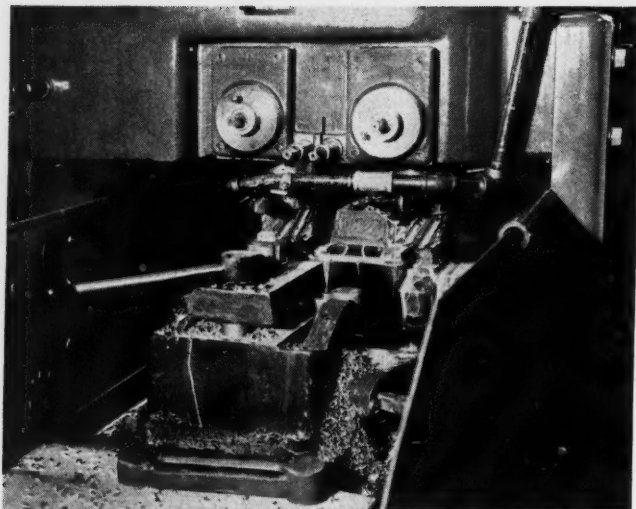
Milling the faces of the ends of the link connecting rods. The ends are milled simultaneously and two fixtures are used so that no time is lost on this operation.
